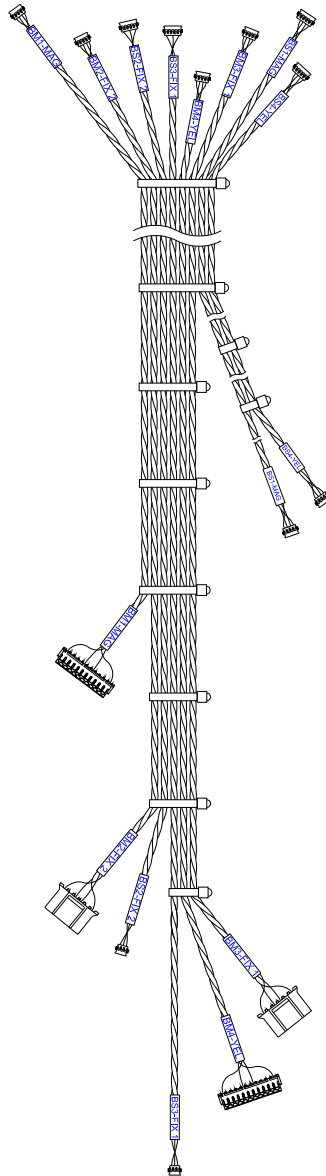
VL4000 Color Bulkhead 1 Cable Assembly
